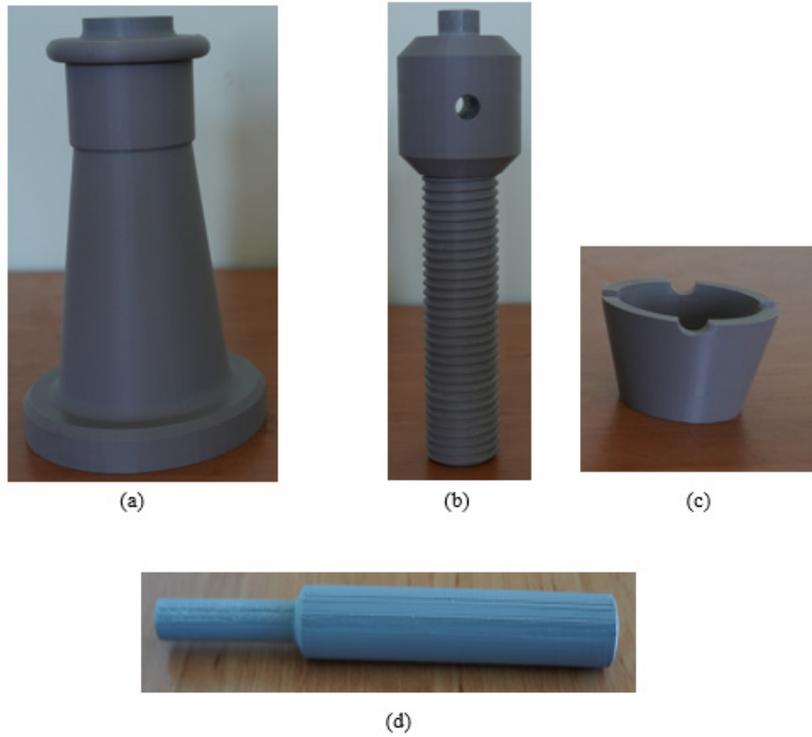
Screw jack mechanism (a) body-nut;(b) screw;(c) cup; (d) tommy bar.
